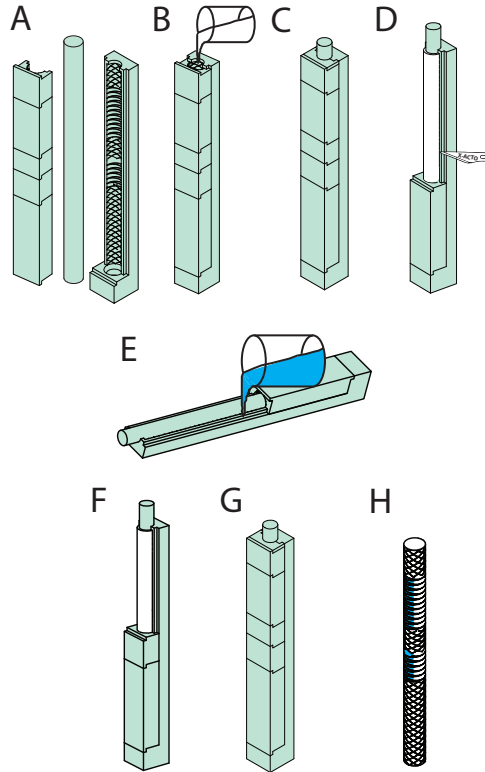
Fabrication of a segmented actuator. (A) A metal rod and 3d printed mold are used to mold the elastomer. (B) First, Elastomer 1 is used to make the entire actuator. (C) Elastomer 1 is left to cure. (D)-(G) The elastomeric segments are fabricated one by one. (H) The mold is removed and the actuator is capped with Sil-Poxy.
